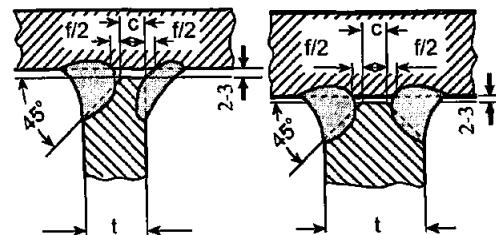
Single and double-bevel welds with unwelded root face and defined incomplete root penetration
